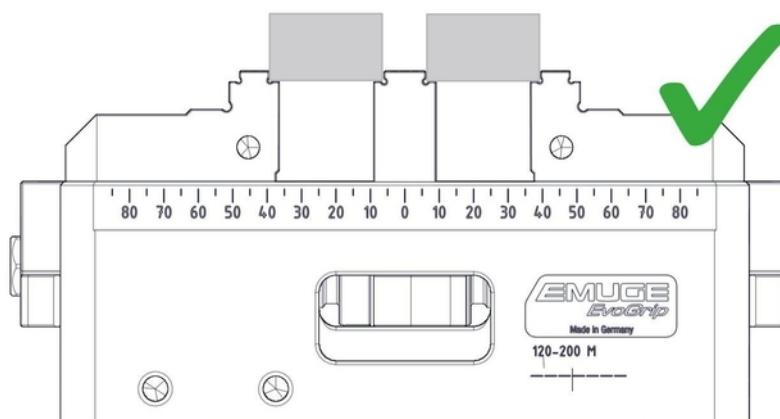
Schematic illustration: Correct clamping of 2 workpieces
